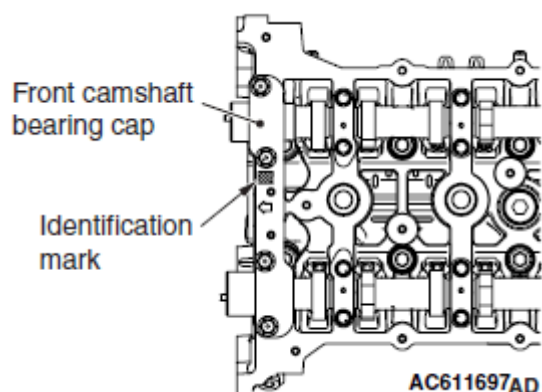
Identifying Front Camshaft Bearing Cap And Identification Mark
